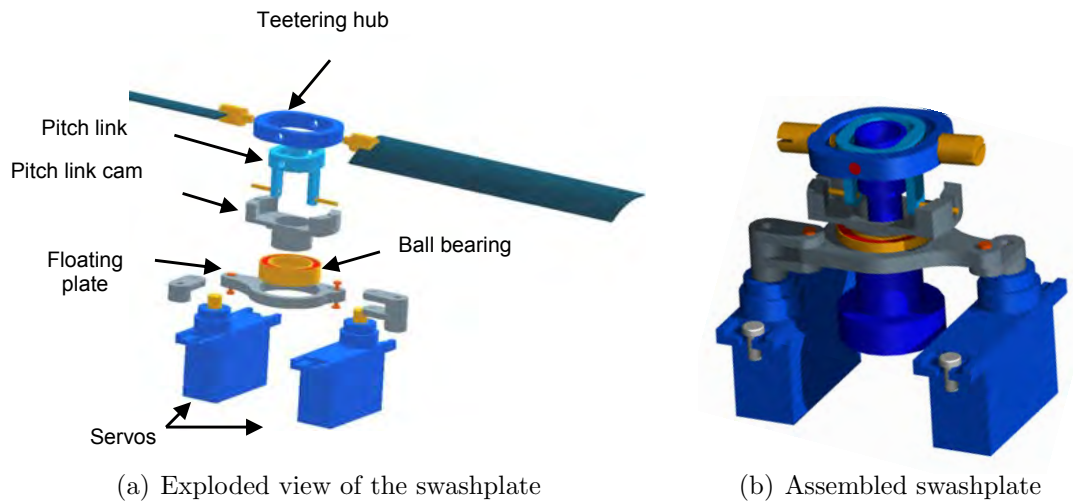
Exploded and assembled views of the custom designed swashplate.
